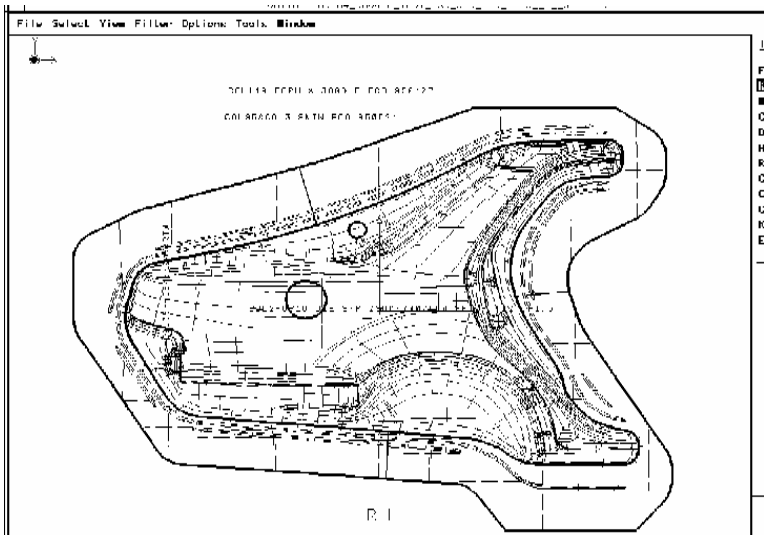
Searching the Skipped Surfaces in Quarter Outer Panel
